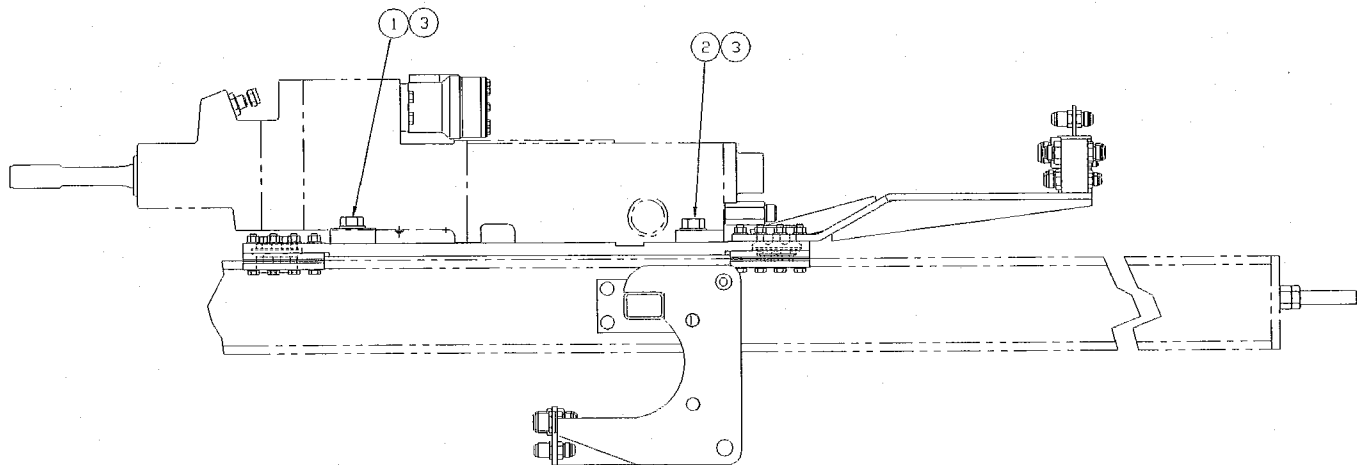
HPR45 Drill Mounting Bolts (ref. 418546)
